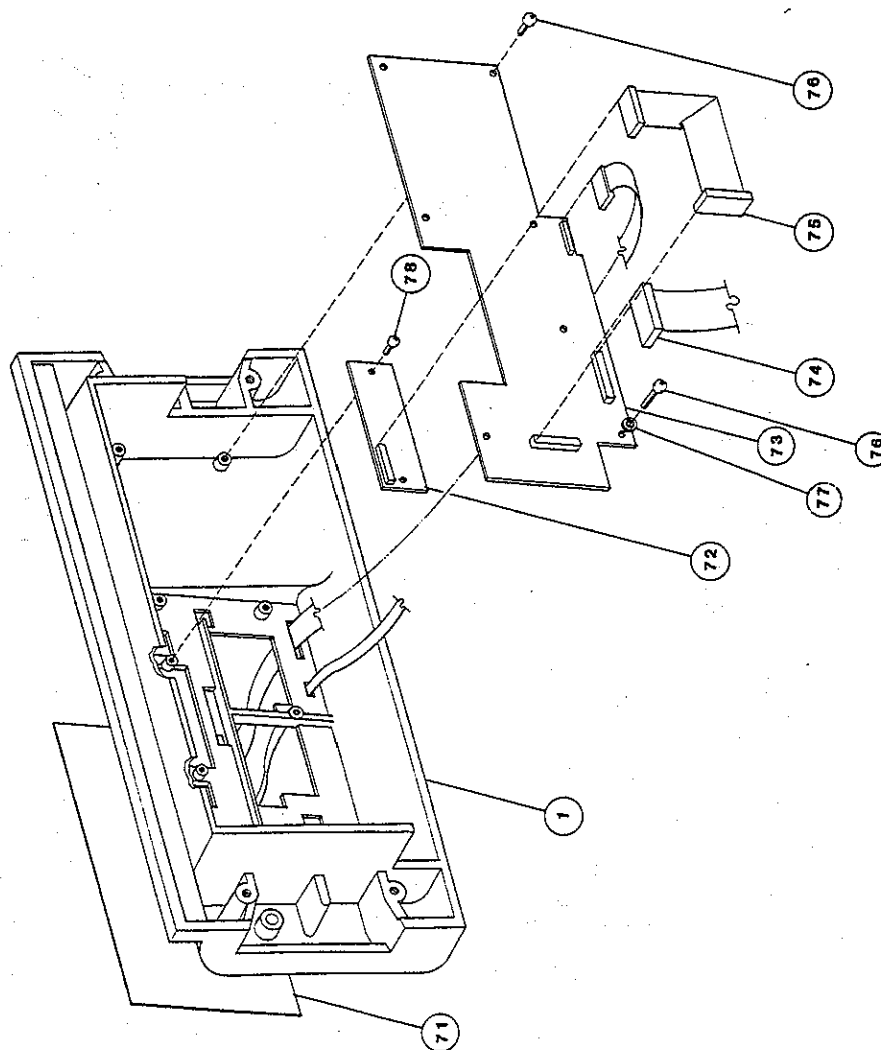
PARTS LOCATION DIAGRAM, CONTROLLER ASSEMBLY
